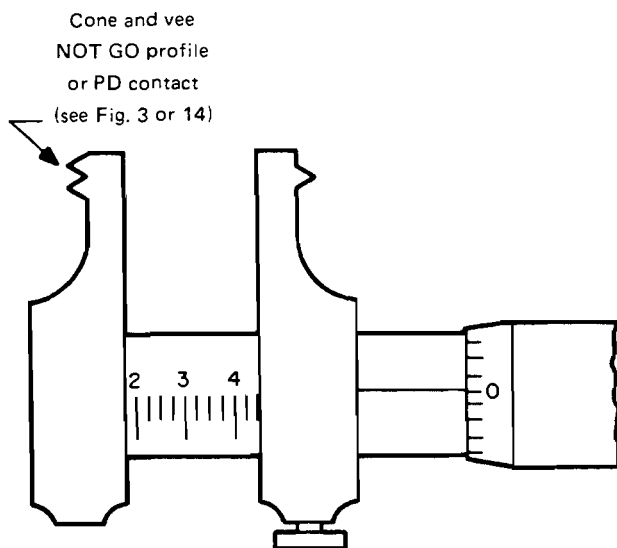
INSIDE MICROMETER, CALIPER TYPE
